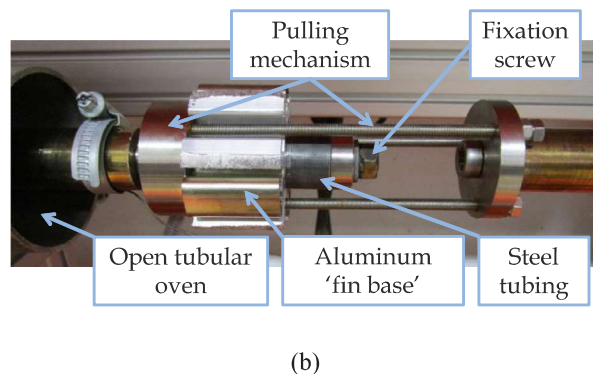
Mechanical removal testing: Pulling device with tube held on the left while the pneumatic cylinder pulls the sheath the aluminum ‘fin base’ to the right shown as (a) schematic and (b) picture.
